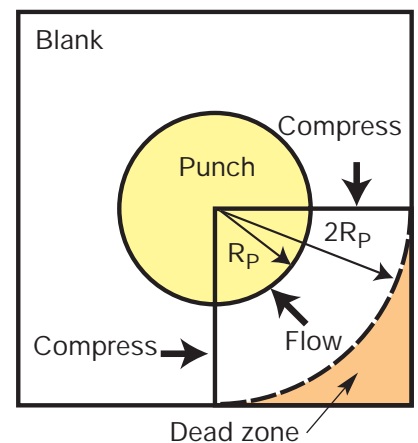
Attempting to deep draw a cylindrical cup from a square blank creates a dead zone of material at each corner that restricts material flow and encourages early fractures in the cup wall.
